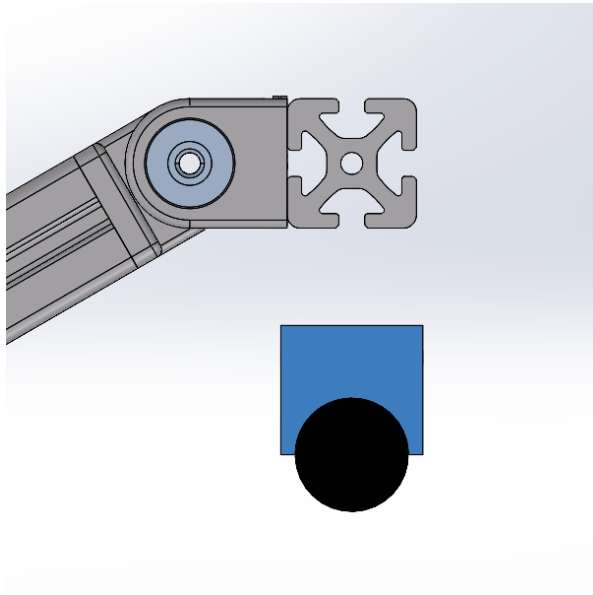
Side view of the handlebar mount clamped around the handlebar.
